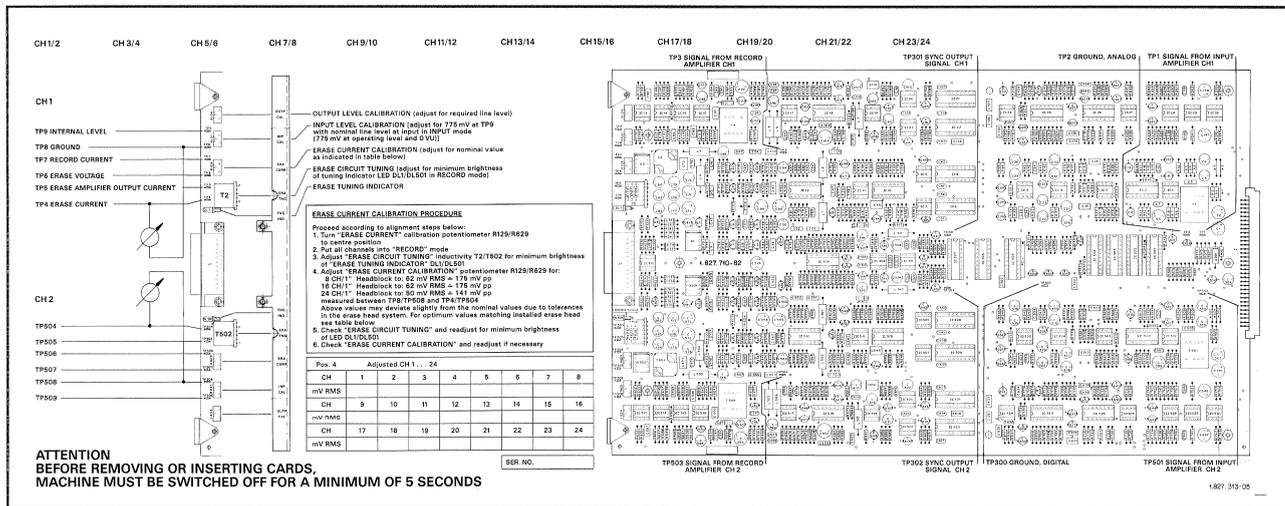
AUDIO ELECTRONICS PCB 1.827.710.xx
